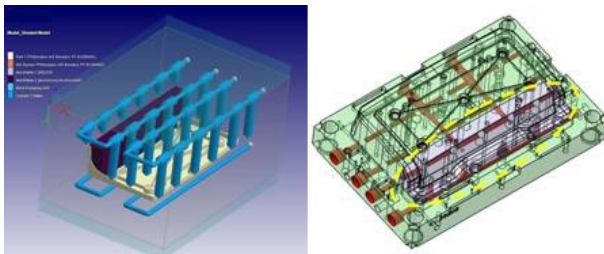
The modified tool layout and the core side of the tool with the bronze insert
